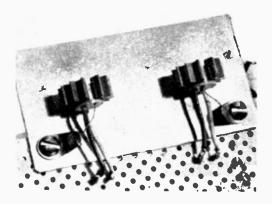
Photo shows how Q1 and Q2 are mounted on aluminum plate. Finned heat sinks are Motorola HEP-158. Collectors are connected to solder lugs.
